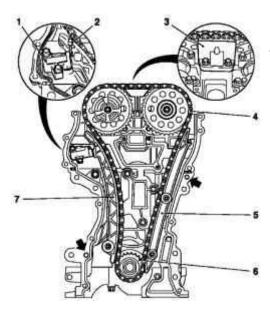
Installing the valve gear: 1 - timing chain, 2 - a special tool, 3 - slide 4 - timing chain drive mechanism; 5 - slide 6 - Leading gear; 7 - bus clamping
